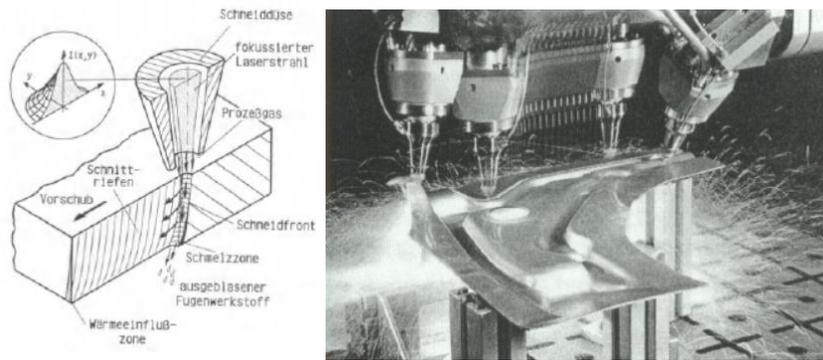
Laser cutting technique (Hachul, 2006)
